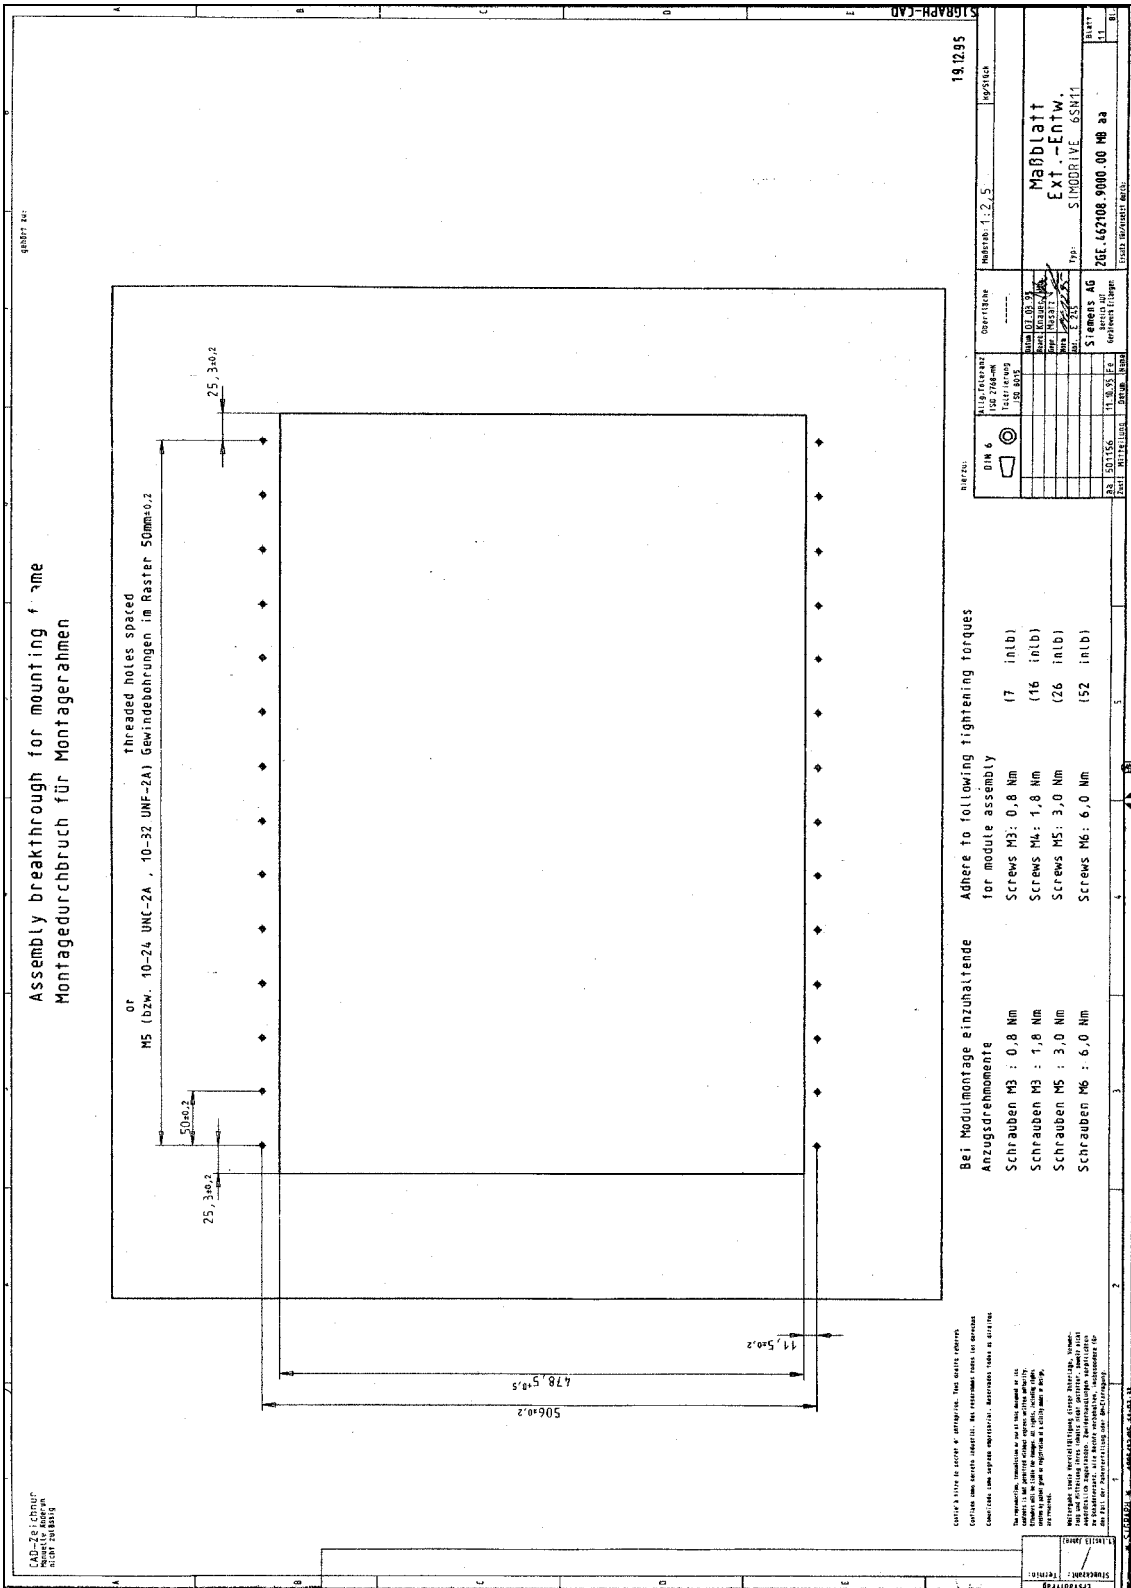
External cooling, mounting break-through for the mounting frame
